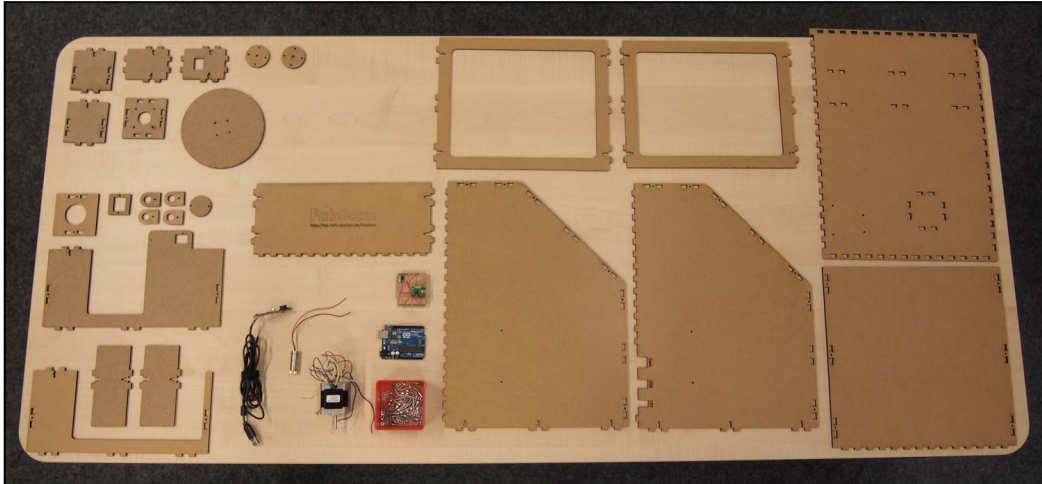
Material needed for the assembly. Note: Housing middle is not in the picture.
